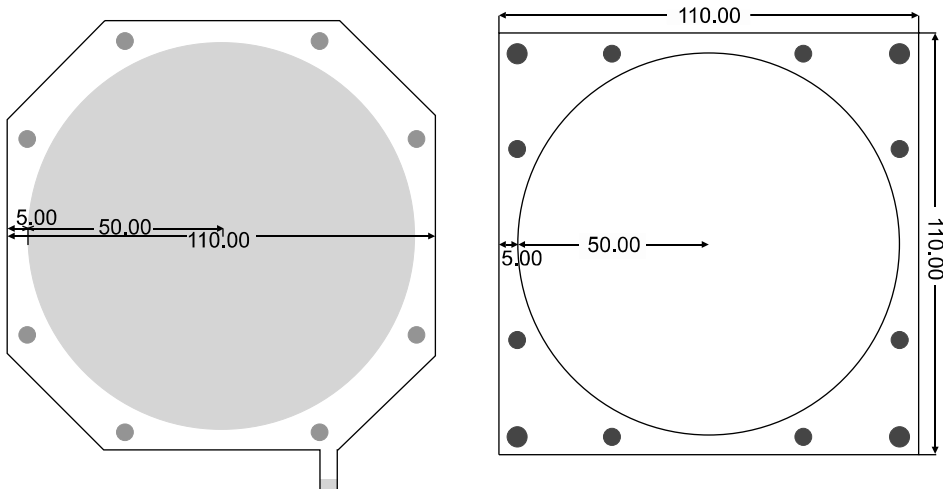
Design of FPCB and base-plate for monitor chamber.
